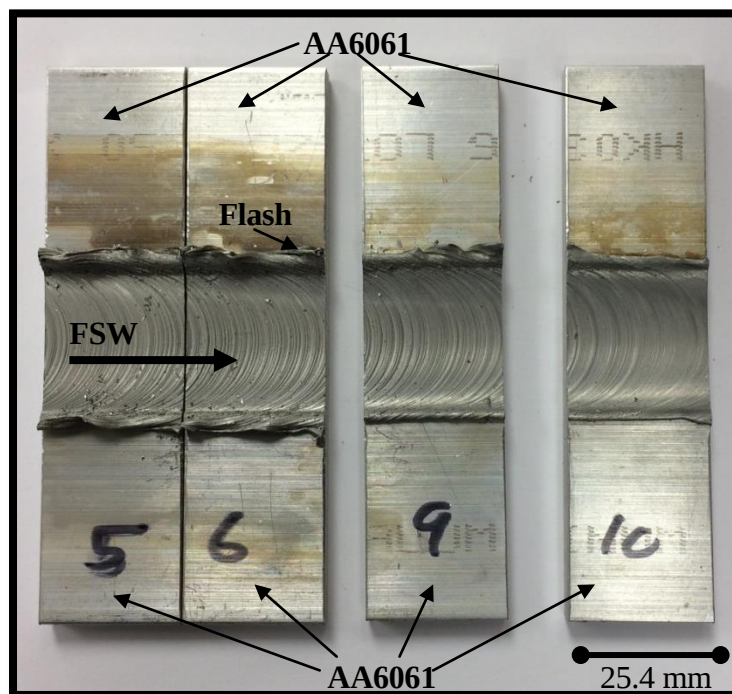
AA6061-AA6061 FSW test coupons before flash machined.
